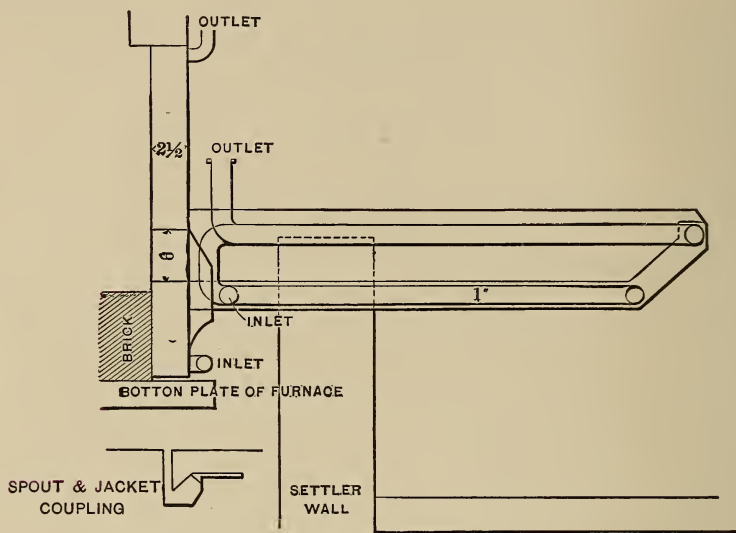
THE HIXON SLAG-SPOUT; LONGITUDINAL SECTION.
